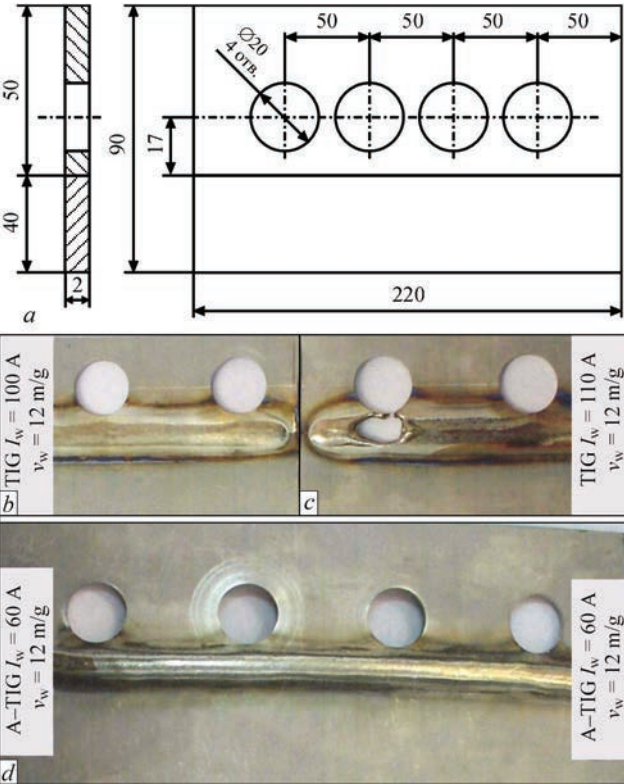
Appearance of fragments of welded specimens-imitators from VT-20 alloy of $\delta = 2$ mm thick at a full penetration: scheme of preparation of specimen-imitator (a); TIG welding, welding current is 100 A (b) and 110 A (c); A-TIG welding, welding current is 60 A (d)
